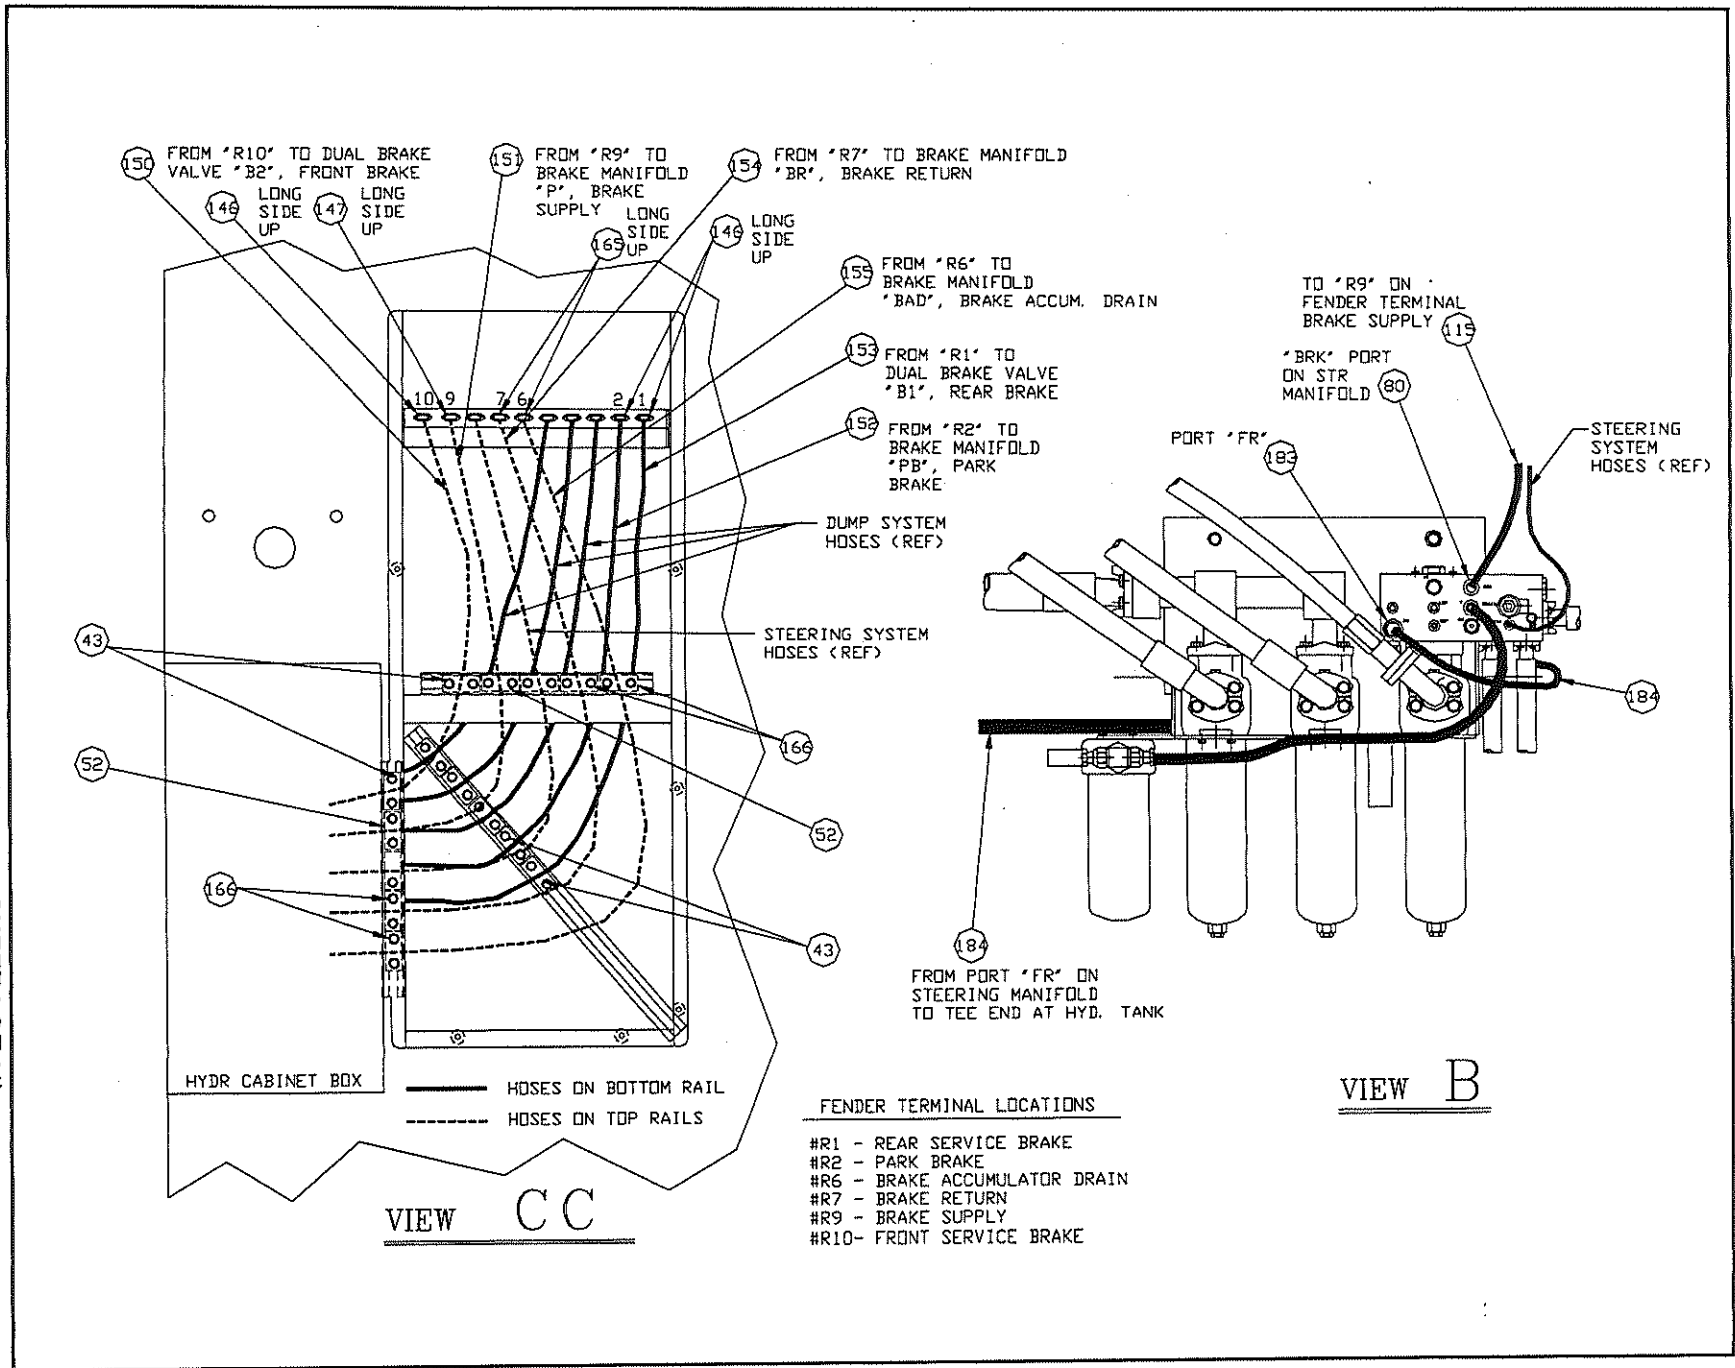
BRAKE SYSTEM ASSEMBLY (A85184, SHEET 7 OF 11)
